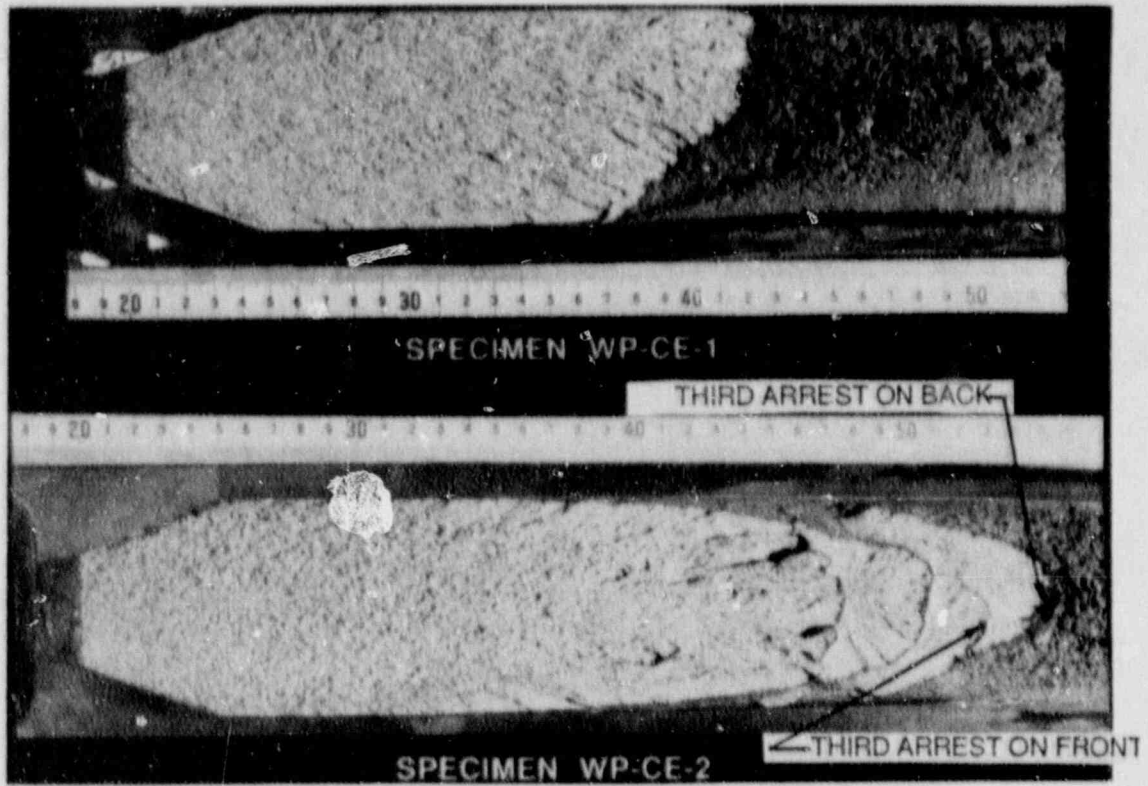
Fracture surfaces for specimens WP-CE-1 and -2.
